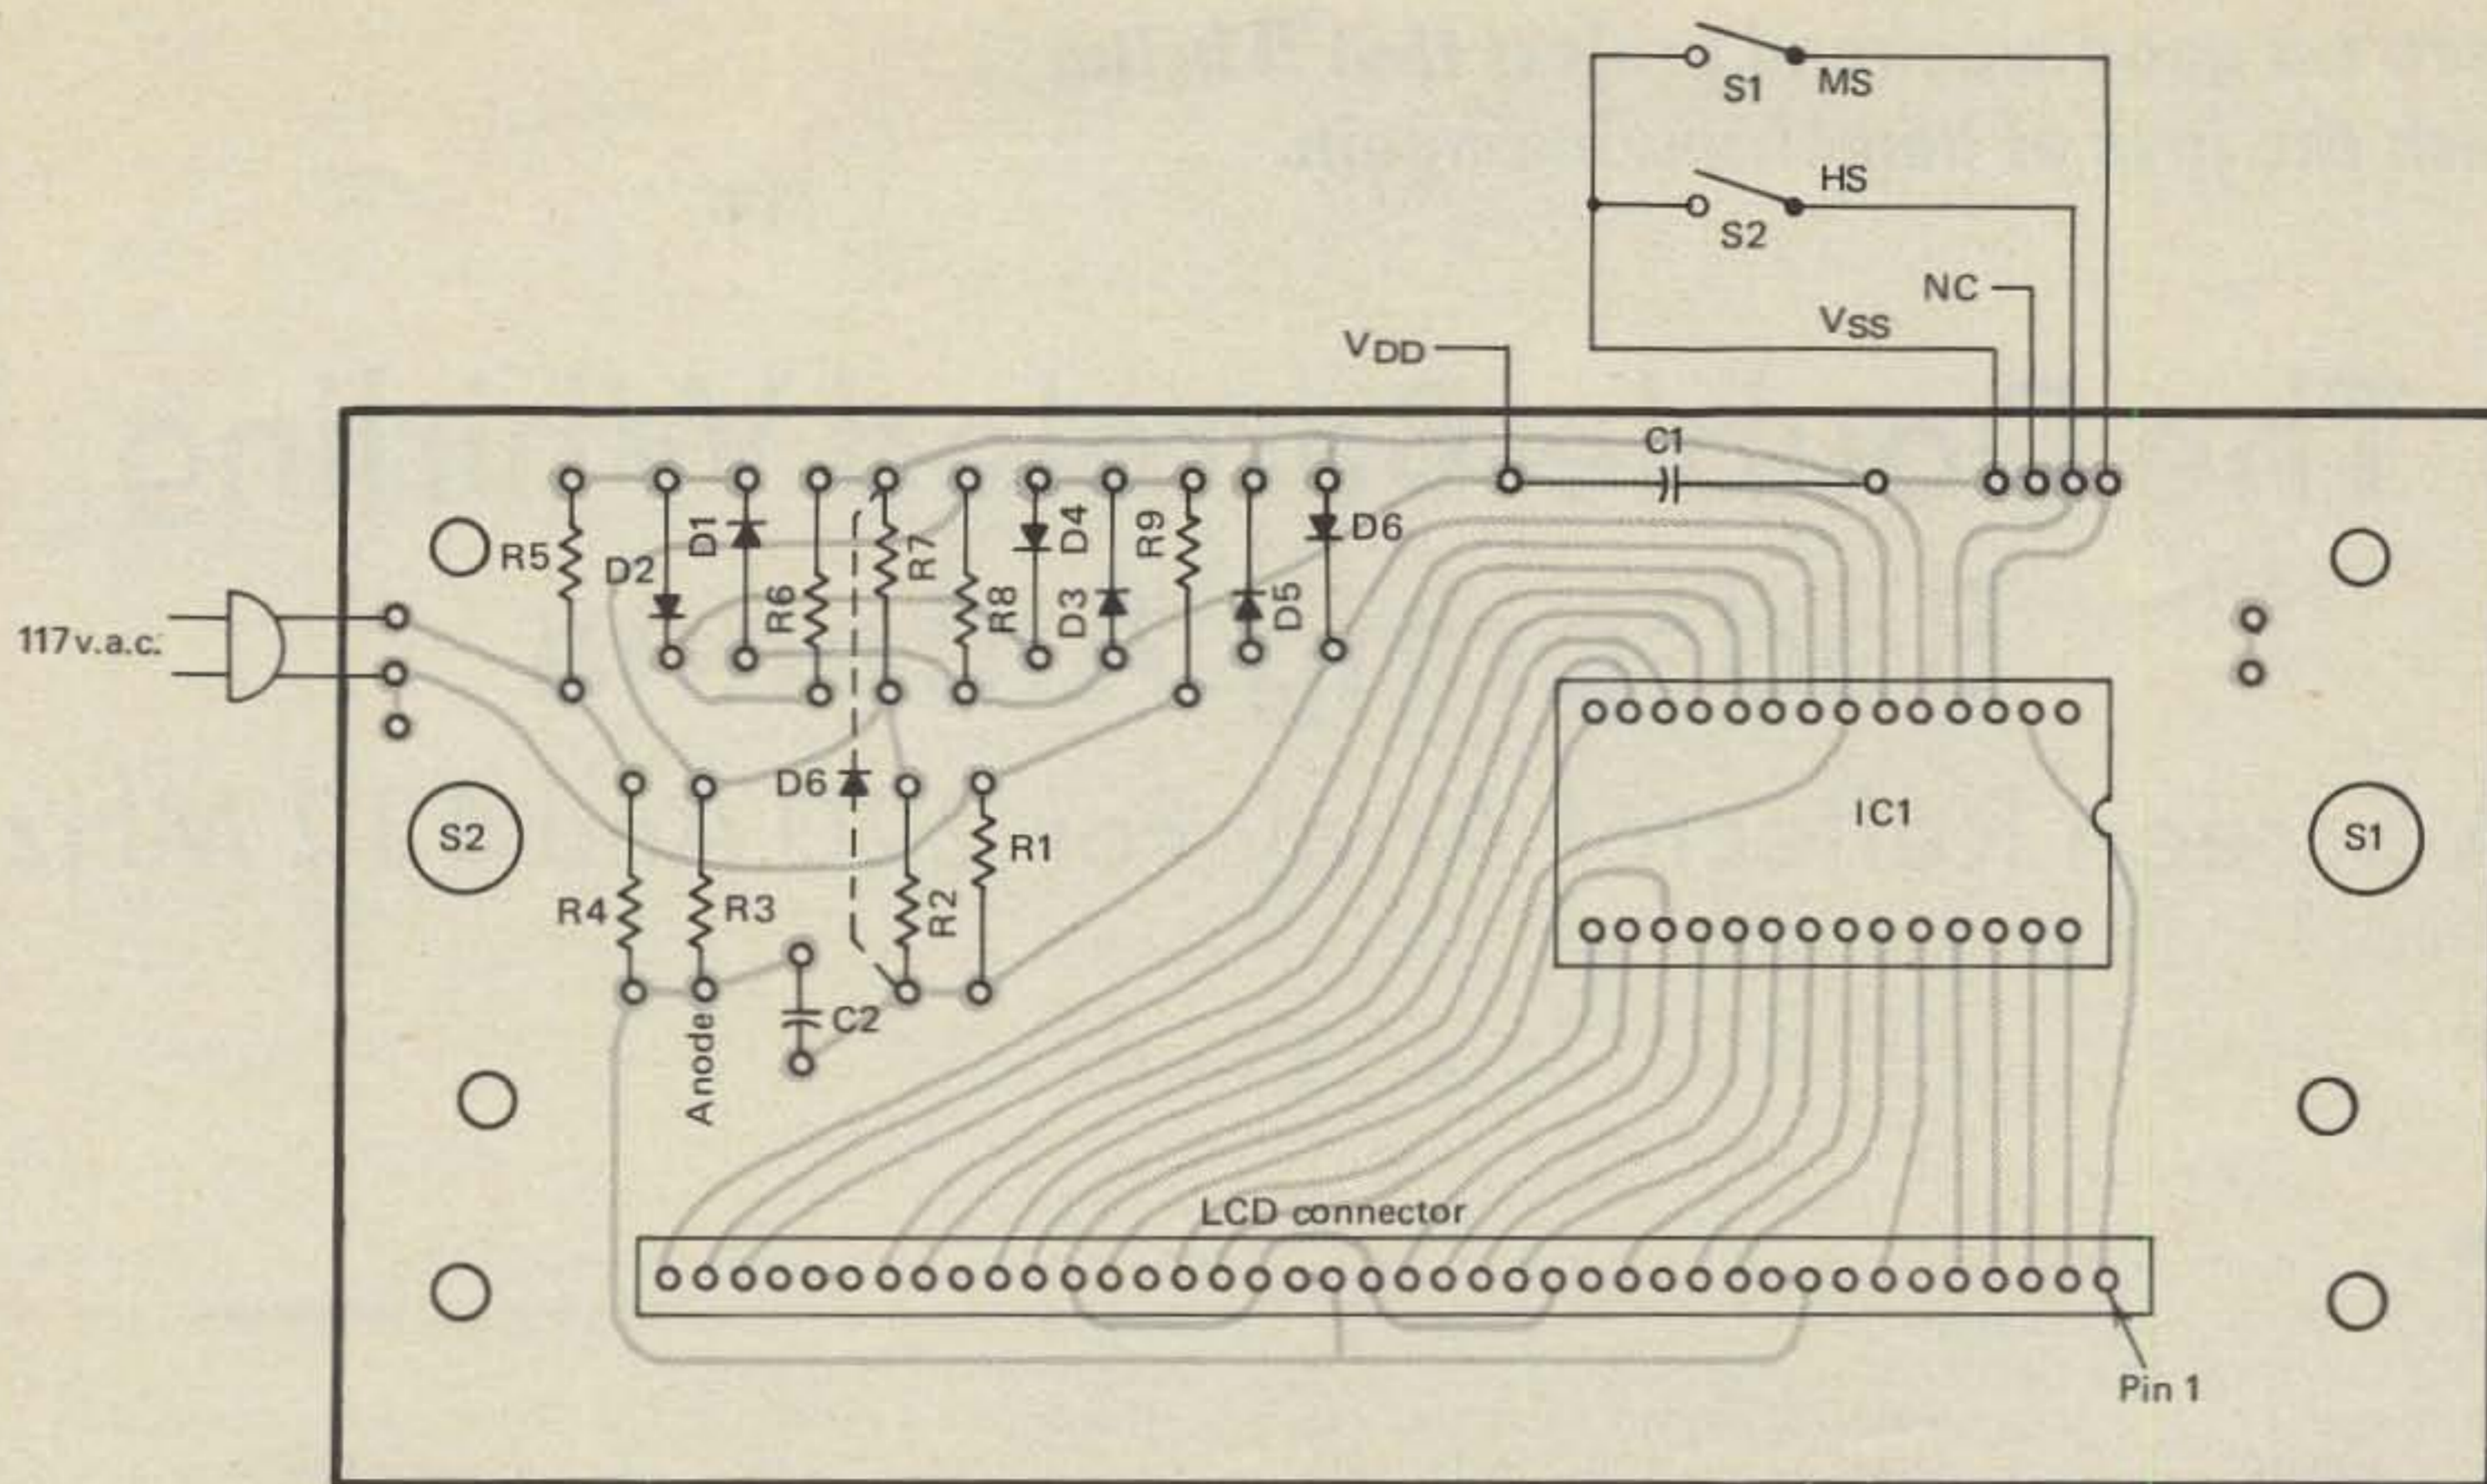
Component layout of printed circuit board. An IC socket is used for easy assembly.
